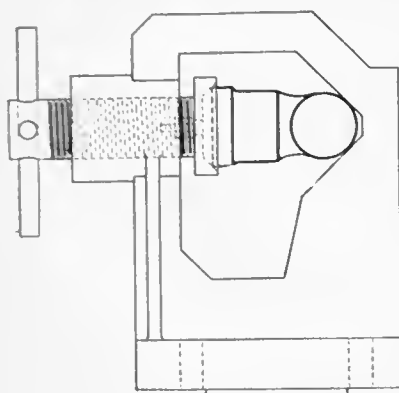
FIXTURE FOR HOLDING ROD END WHILE MILLING.
